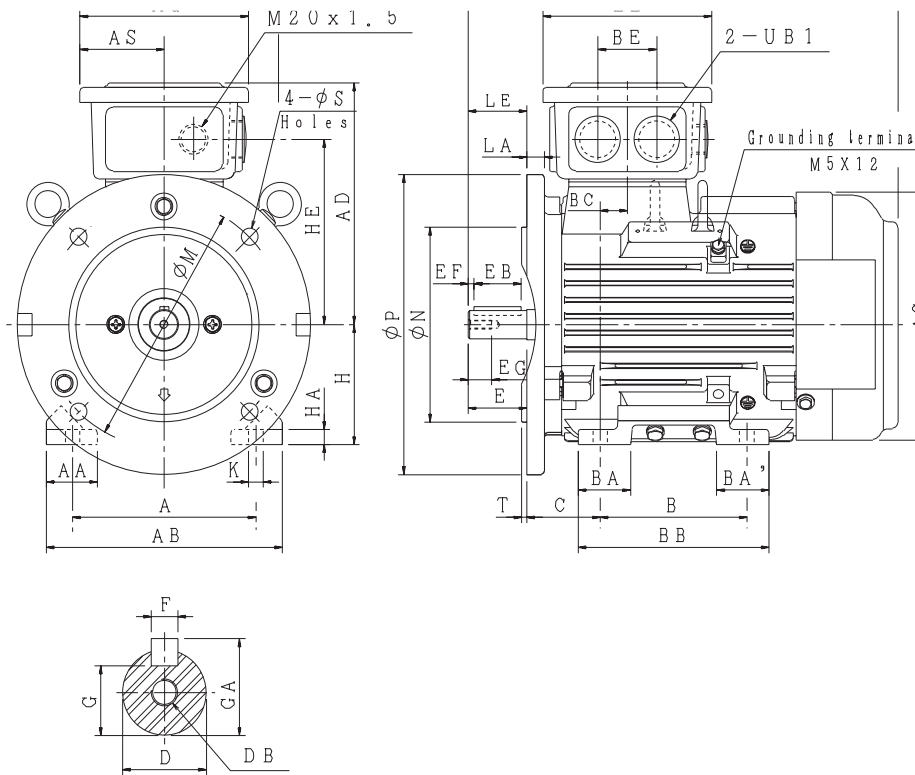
Outline drawing of cast iron design, feet version, mounting B35; frame size 132M - 100L
